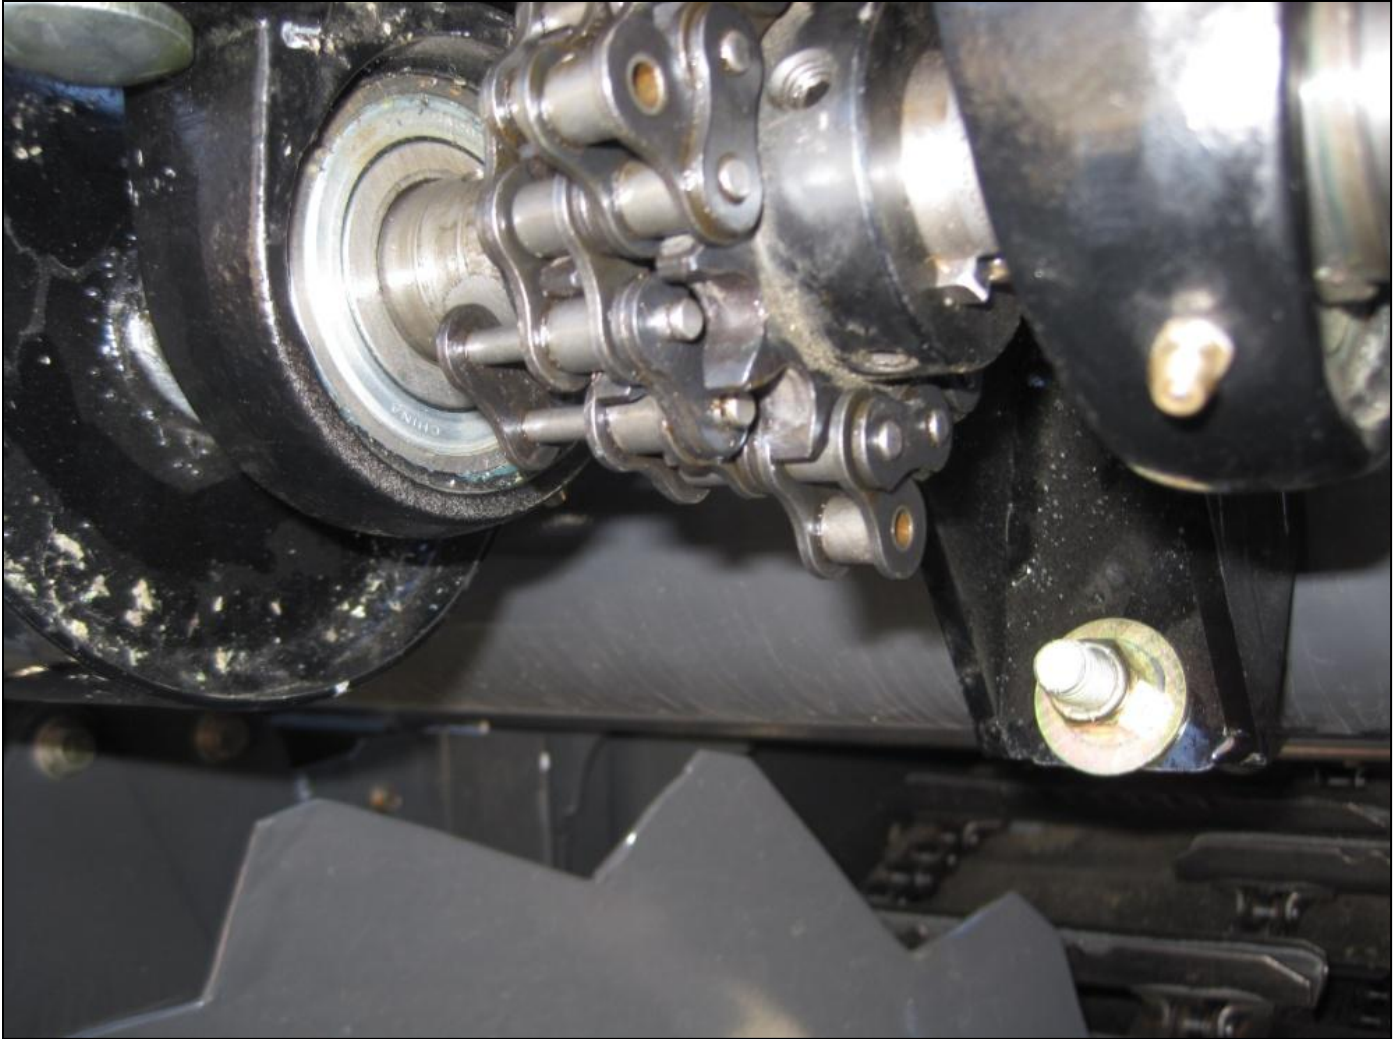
Install the center link to chain coupler with one side bent out of way.
